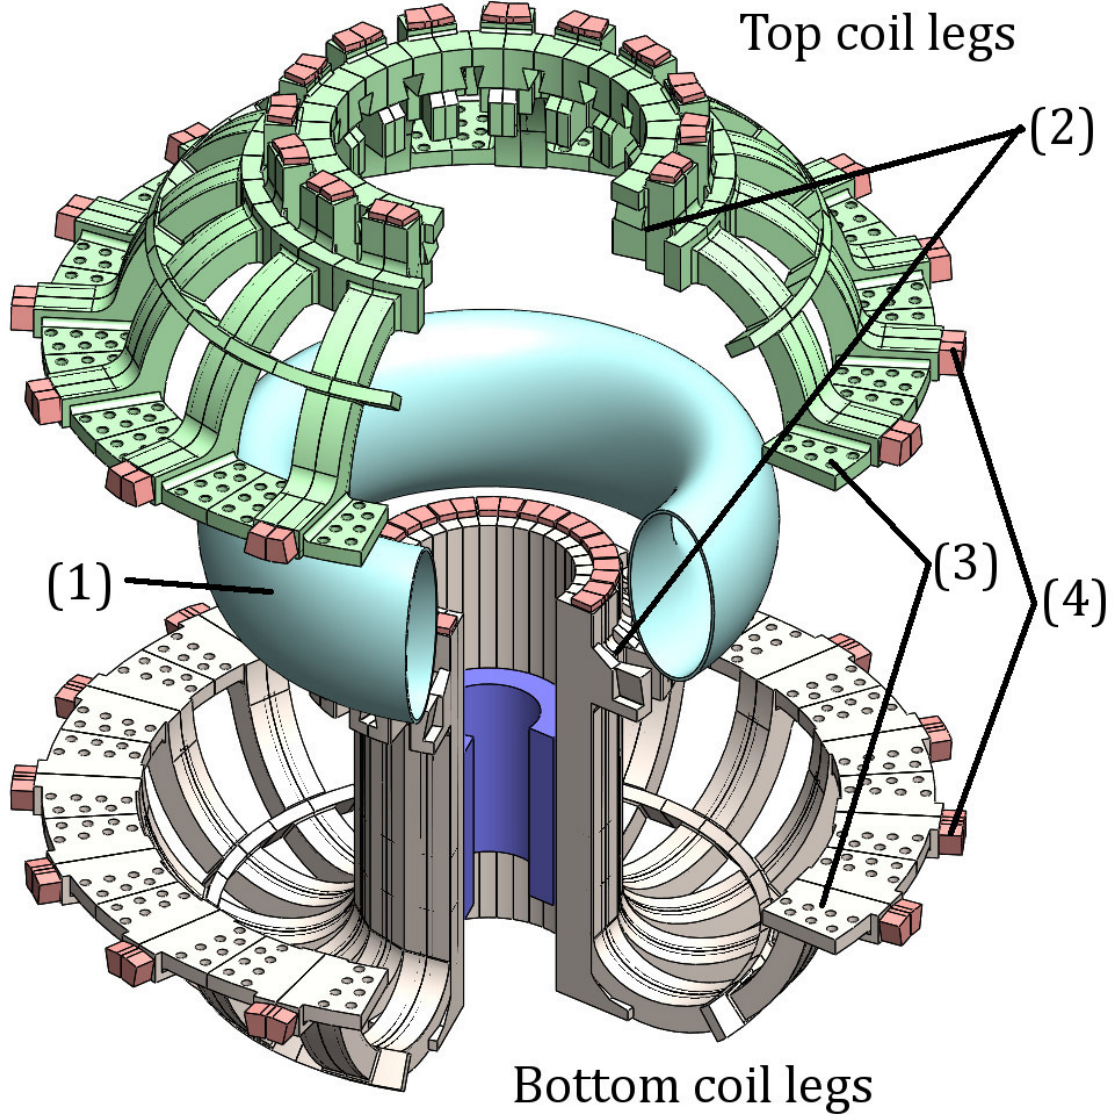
Conceptual design of the TF coil system. The coils are disassembled, with the vacuum vessel (1) in the process of being removed. The coils are supported by wedging against each other. The coil mechanical joints are (2) and (3). (2) is a triple dovetail joint, (3) is a bolted joint. (4) are the electrical terminations. The electrical joint is located at the electrical terminations, connected with auxiliary joint structures (not shown).
